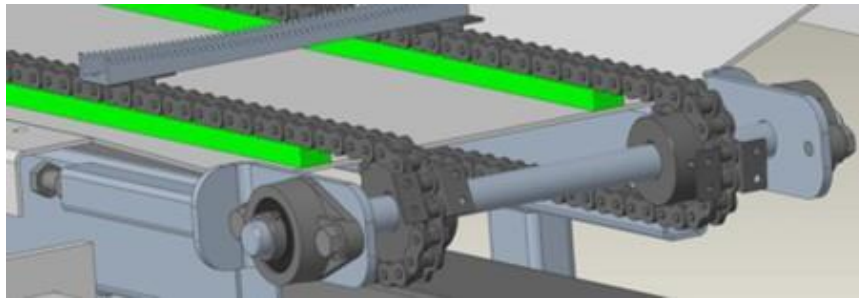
Conceptual design of a part of the chain conveyor assembly
